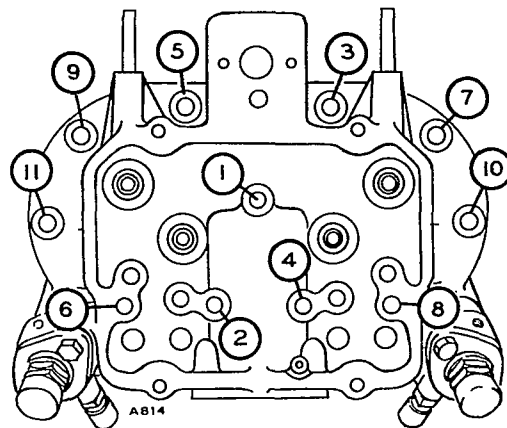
HEAD BOLT TORQUE SEQUENCE
